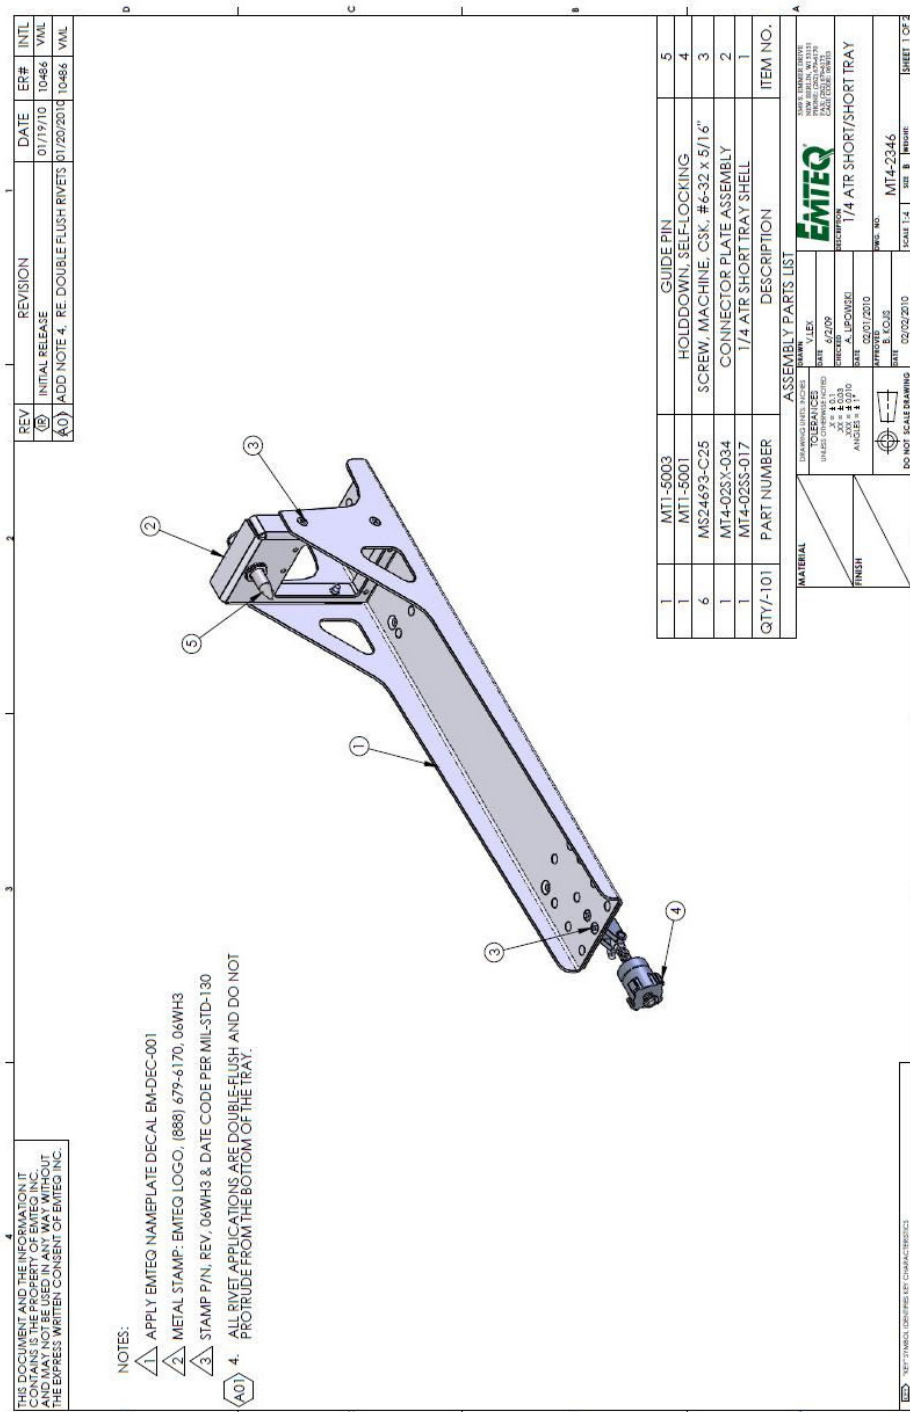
Outline drawing: SBU tray: EMTEQ MT4-2346-101 (page 1)
